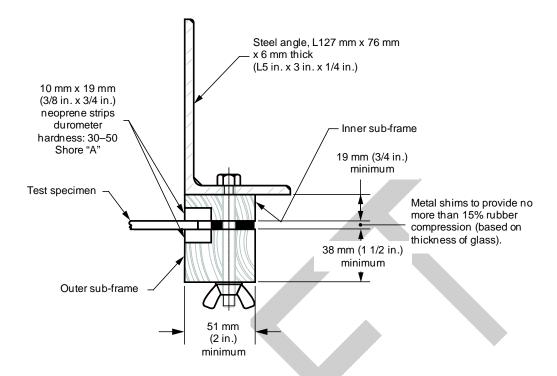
Detail of section A-A properly clamped test specimen [> 3 mm (1/8 in.)]
